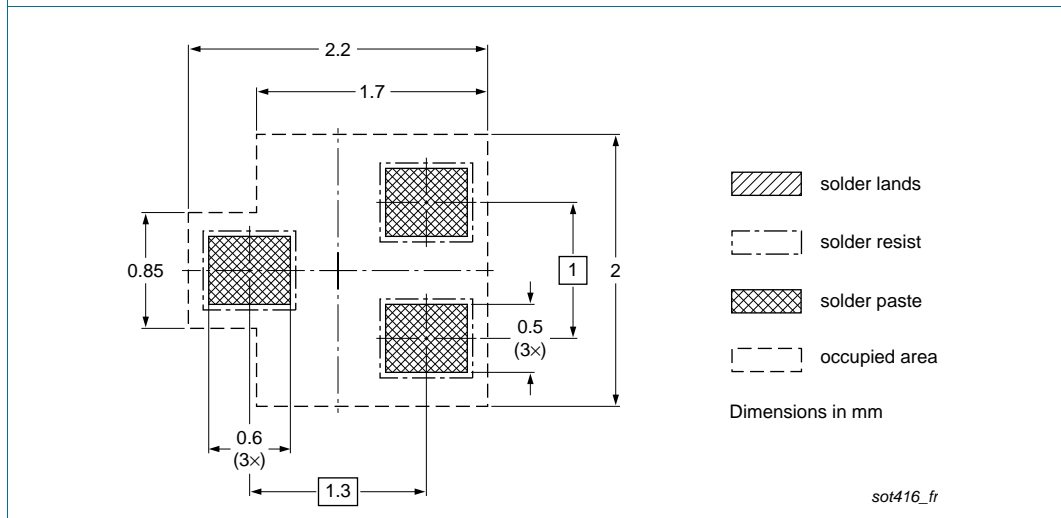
Reflow soldering footprint BAS16T (SOT416/SC-75)
